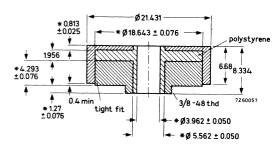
Cross-section of the R.F. choke * See under Fig. 1
